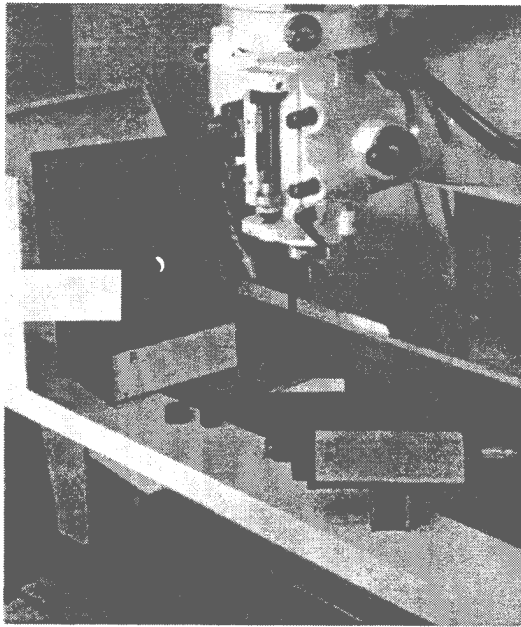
A laser system for circular contouring measurement on a CNC machine tool.
